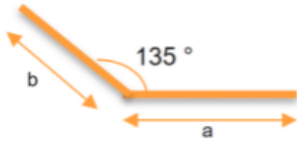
Simple graphic outlining dimensions of prototypes handle that connects the two gears
